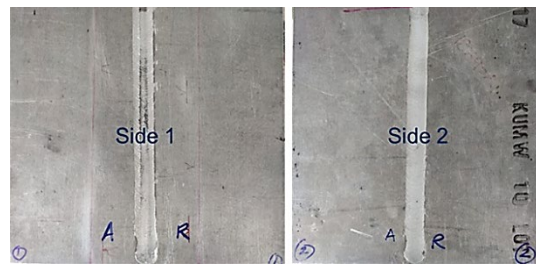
Double side friction stir welded joint showing the weld region on both sides of the joint.
